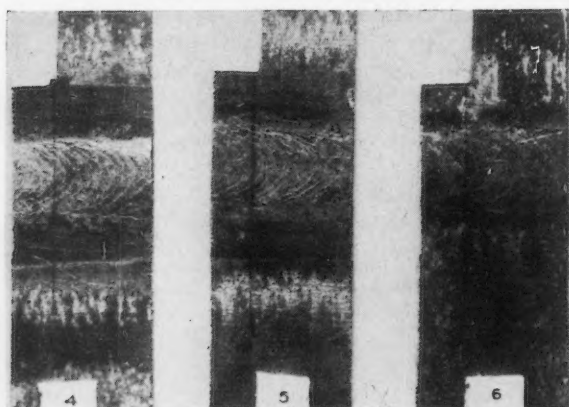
61S-T6 welded with 43S rod after intergranular corrosion test of salt-peroxide solution for 60 hours: Specimen 4—*as-welded*. Specimen 5—aged at 350 degrees F for eight hours. Specimen 6—solution treated 970 degrees F, cold water quenched, aged at 350 degrees F for four hours. Approximately $\frac{3}{4}$ size.
